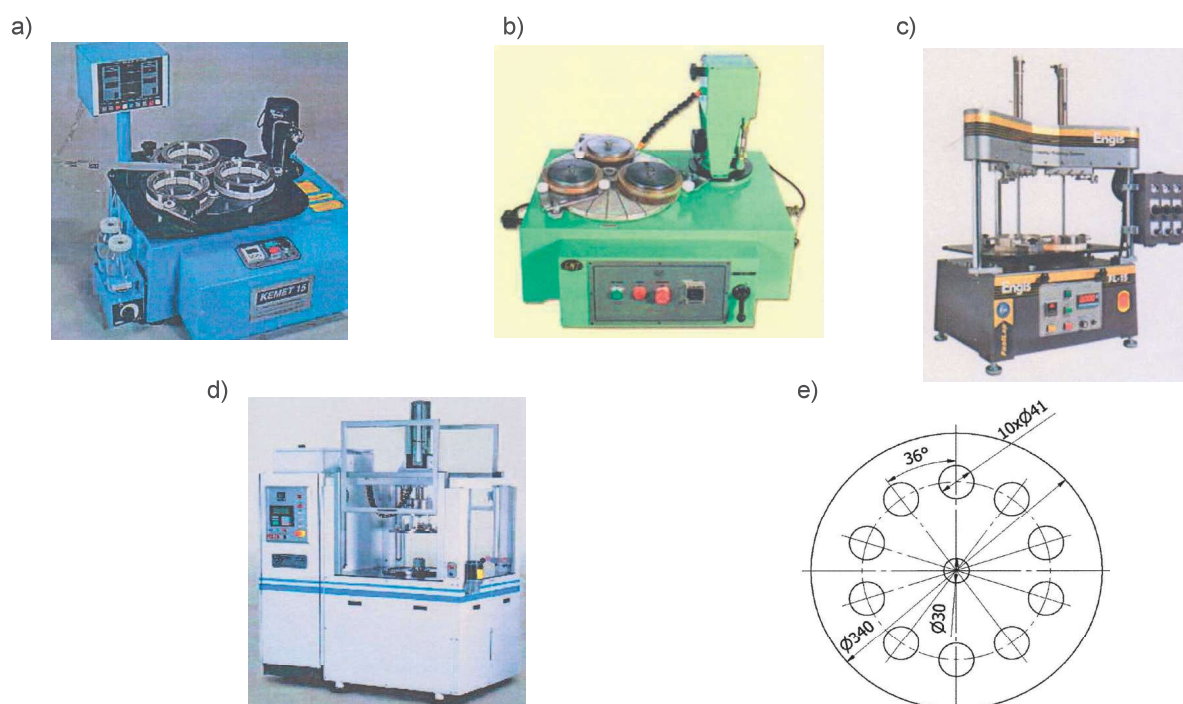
Single-disc lapping machine: a) model 15 produced by Kemet [6], b) model 06-01 produced by GMT [5], c) model FL-15 produced by Engis [4], d) model LSP-6 produced by Lapmaster [7], e) sample separator
